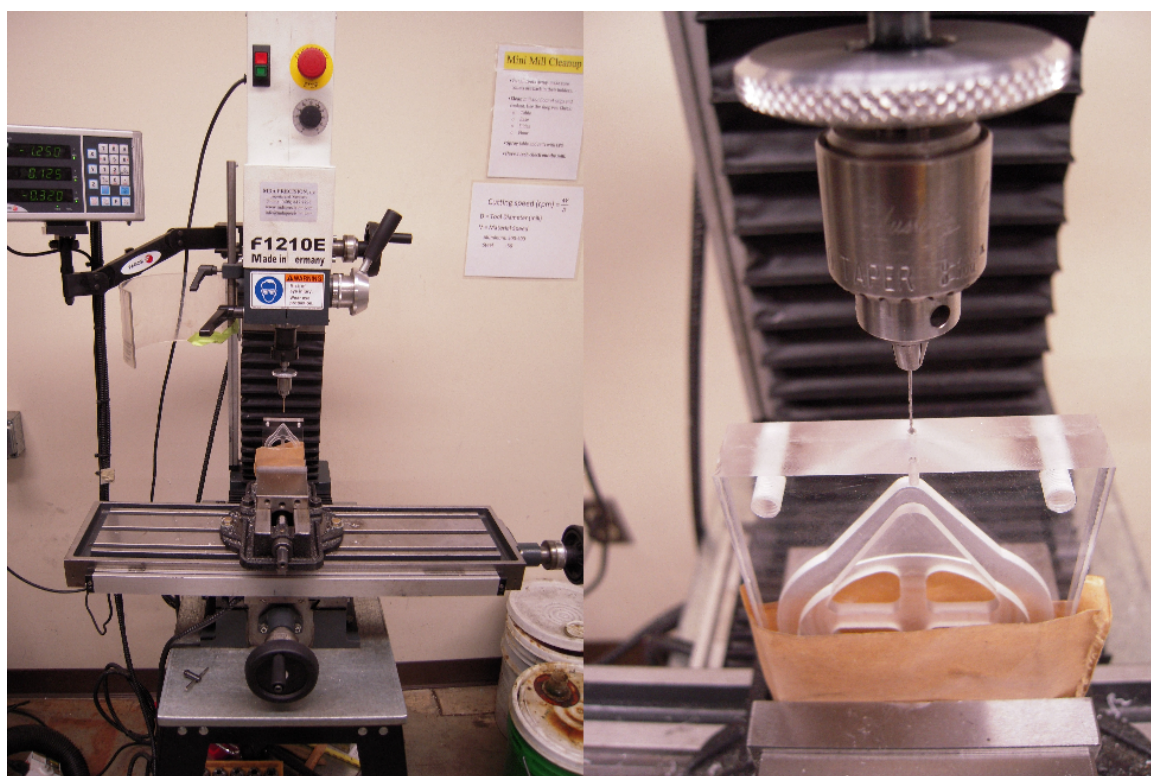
Image shows a montage of the CNC milling of the middle part.
